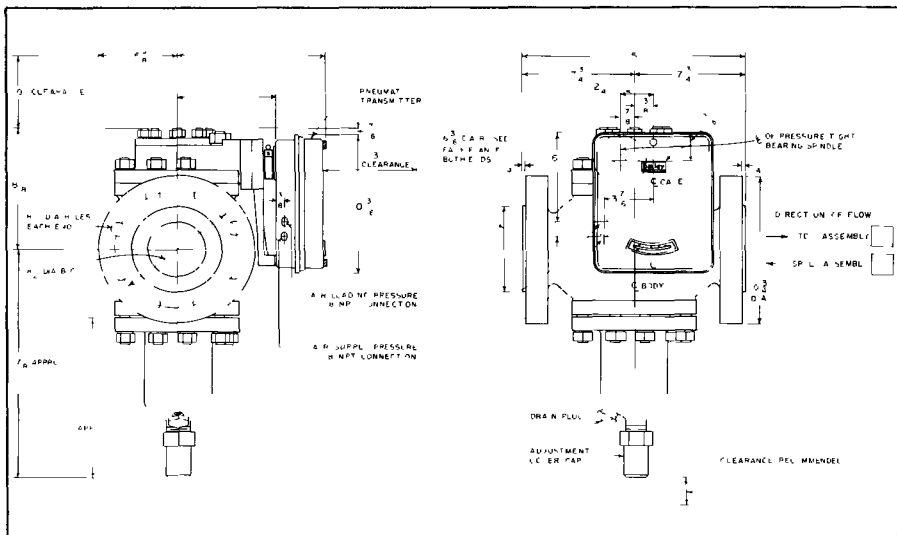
Mounting Dimensions, 4 inch Area Meter, 600 psi (Type JR1342A)
